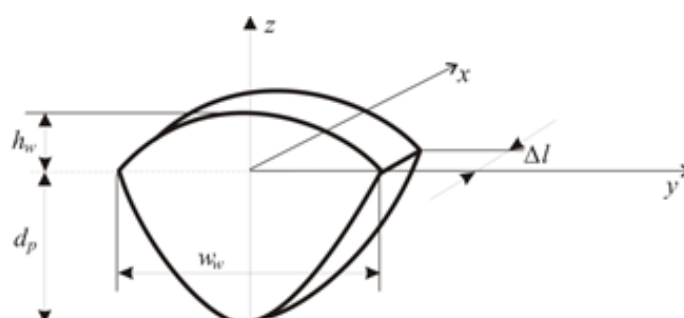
Scheme of the weld geometry: h_w – height of the reinforcement, w_w – width of the weld, d_p – depth of the penetration, Δl – unit length
